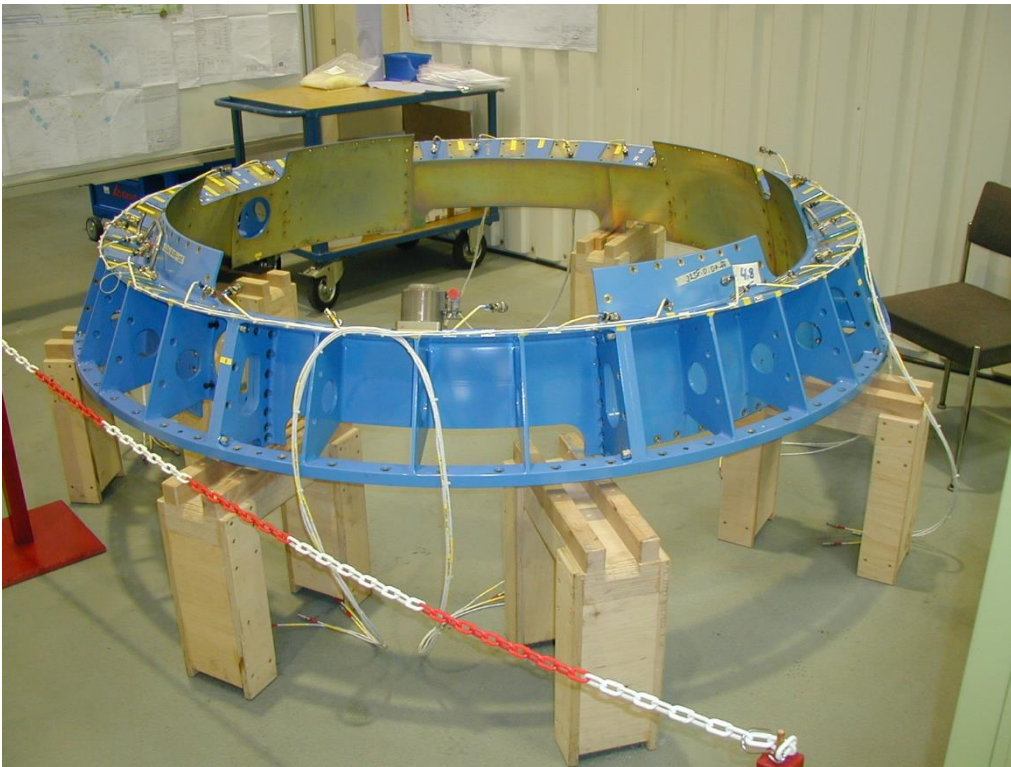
The fine drive bumper system with one of the many bumpers/snubbers attached – October 2001.
